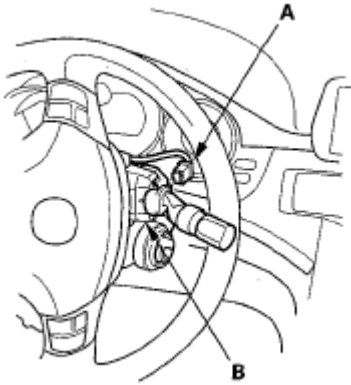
Identifying Dashboard Wire Harness 8P Connector And Wiper/Washer Switch
